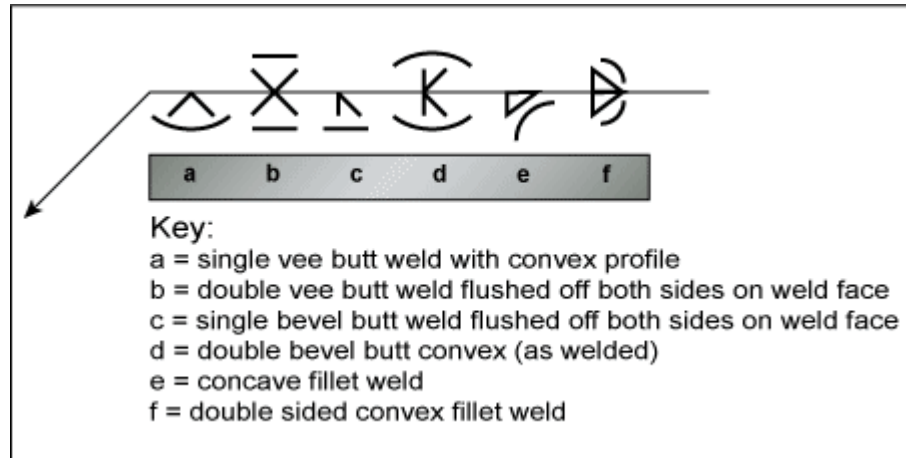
Butt weld shown in a convex profile. (The welding institute n.d.)
